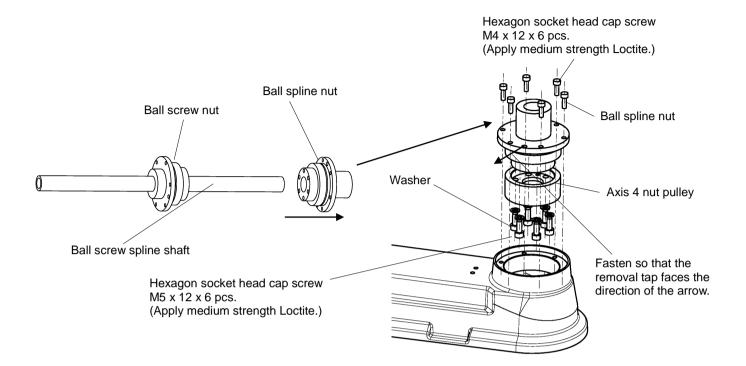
Mounting ball spline nut (KHL-500, KHL-600, KHL-700)
